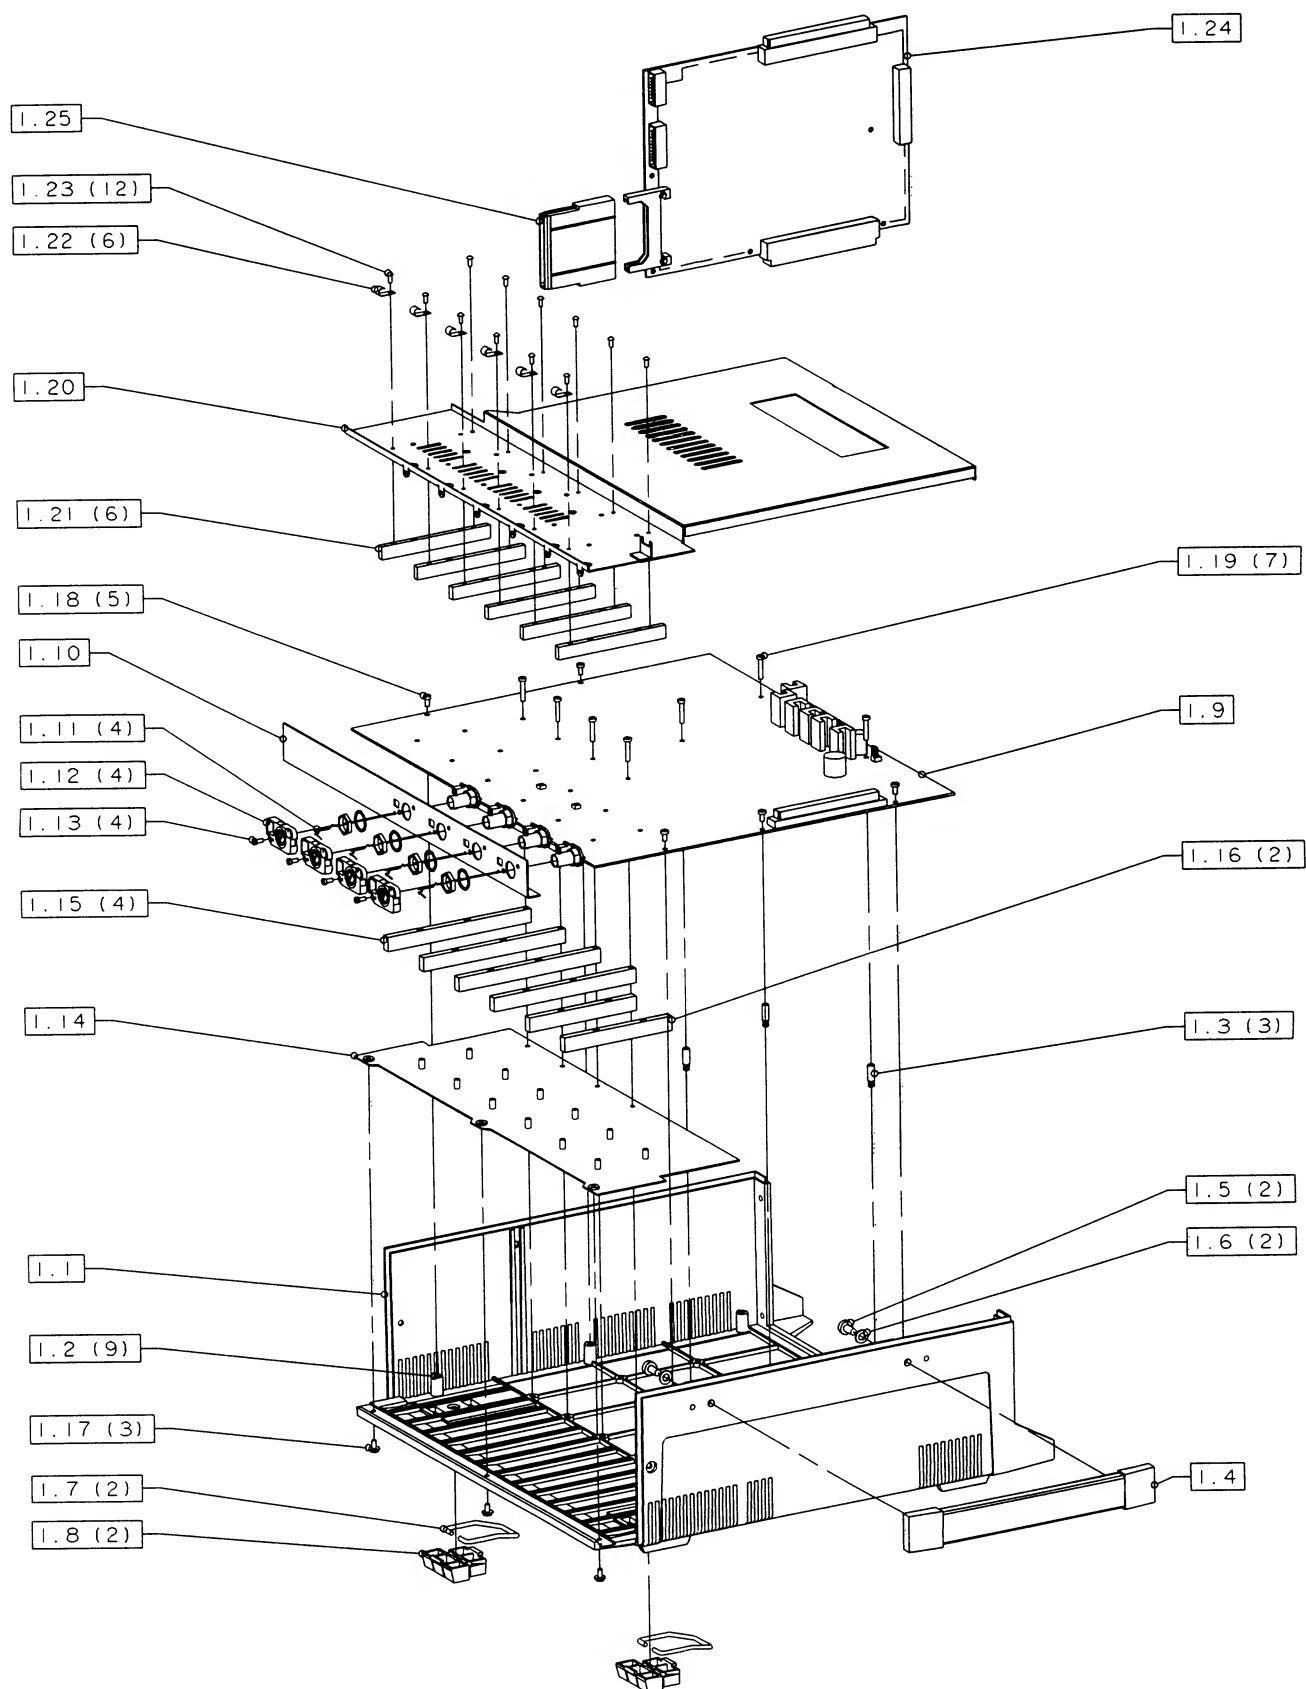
9320 LOWER COVER EXPLODED VIEW
